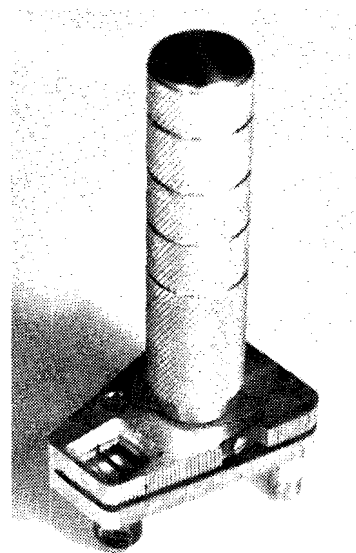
One of the claws of the steel tape, to be locked at zero by a special handle.
